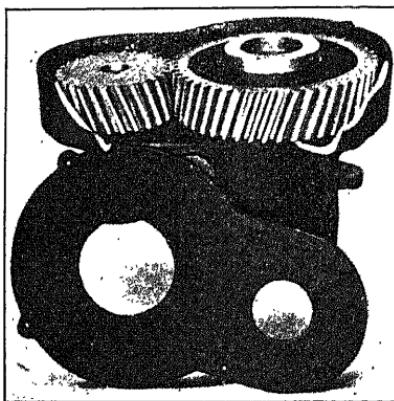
Twisted gears used on the spindle of a drill press. Colburn Machine Co., Cleveland, O.
